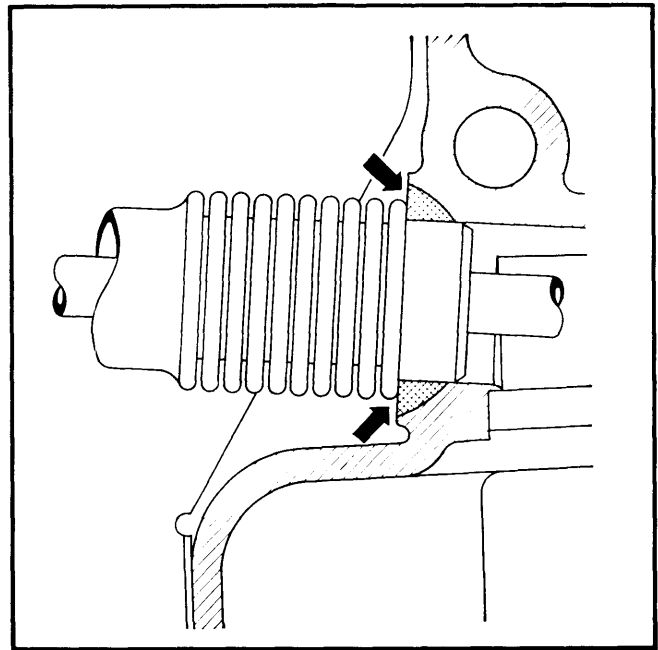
Push Rod Tube Installation with Detail of Seal Fit
